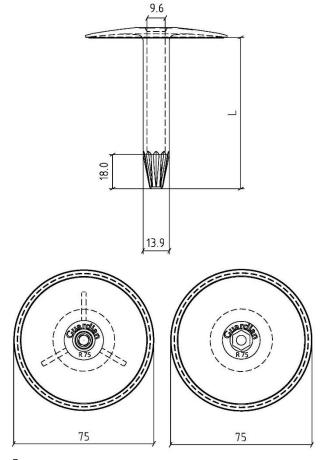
Tube washer R-75 Tube washer HR-75 with hexagonal internal tube shape (used together with ACS 6.1)
